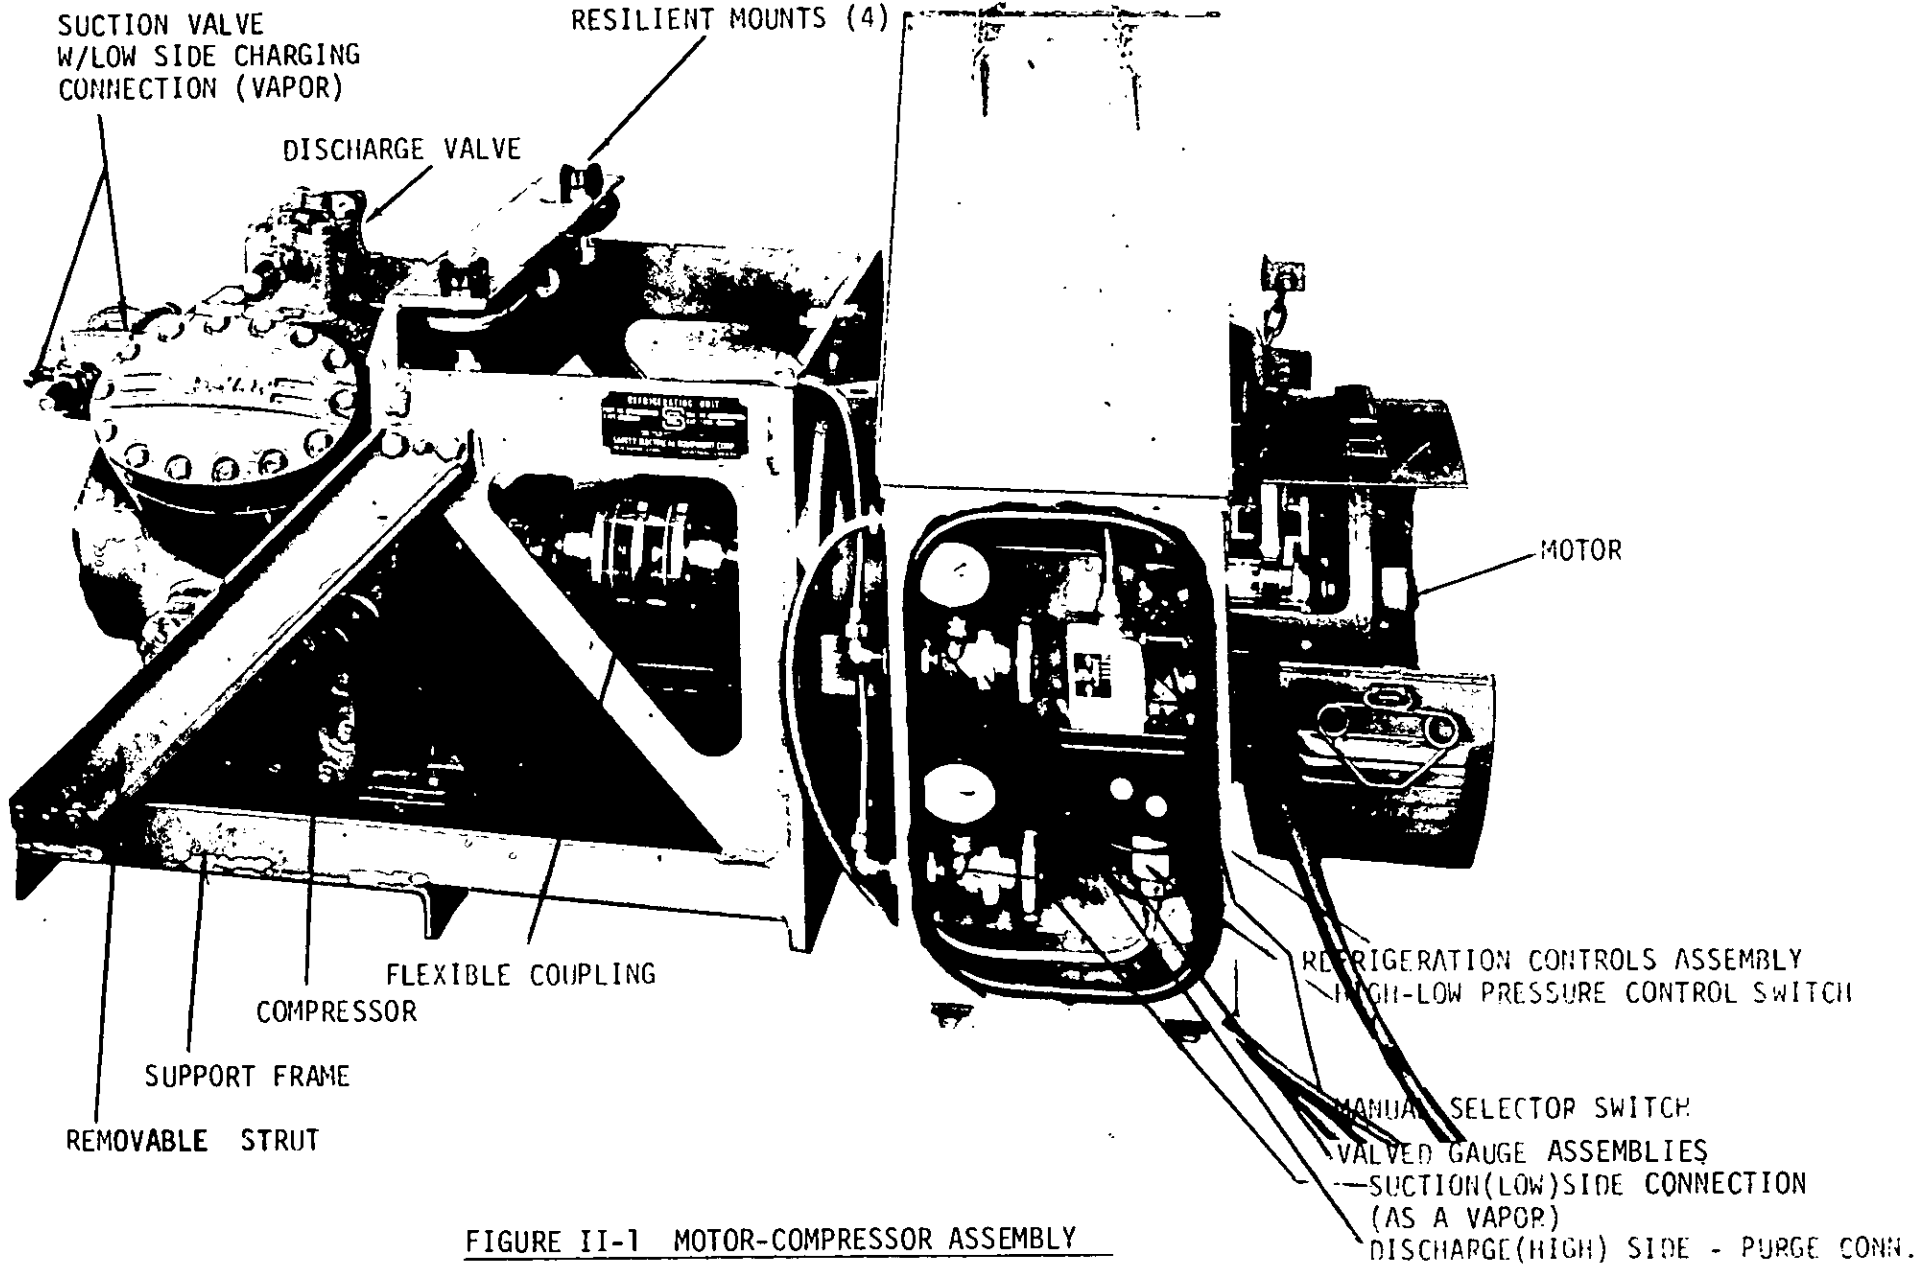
MOTOR-COMPRESSOR ASSEMBLY
